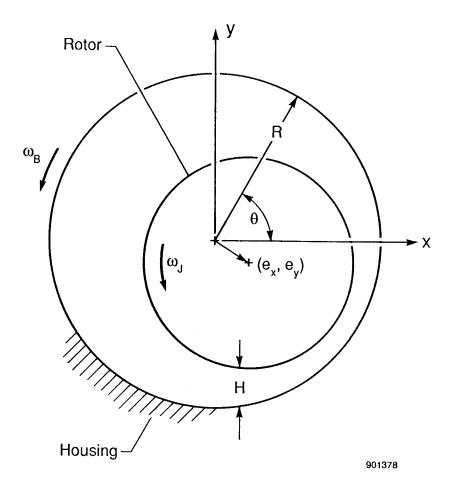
Axial Cross Section of Seal with Eccentric Rotor
